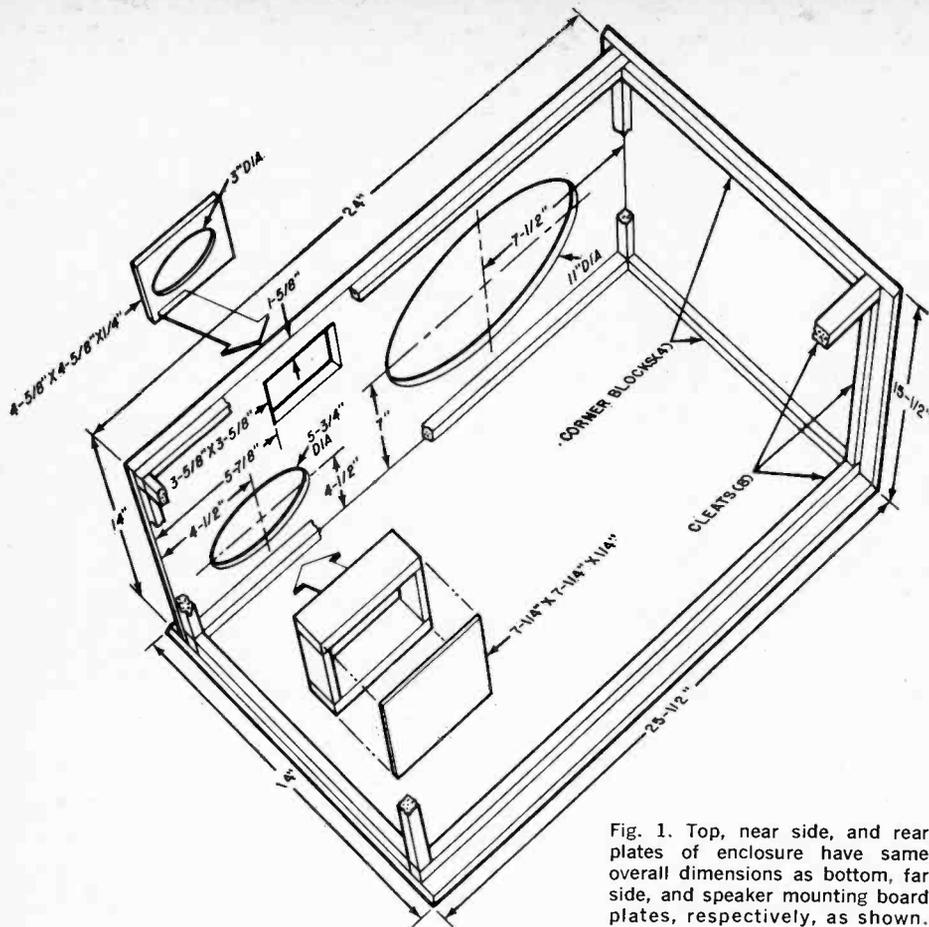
Top, near side, and rear plates of enclosure have same overall dimensions as bottom, far side, and speaker mounting board plates, respectively, as shown.
